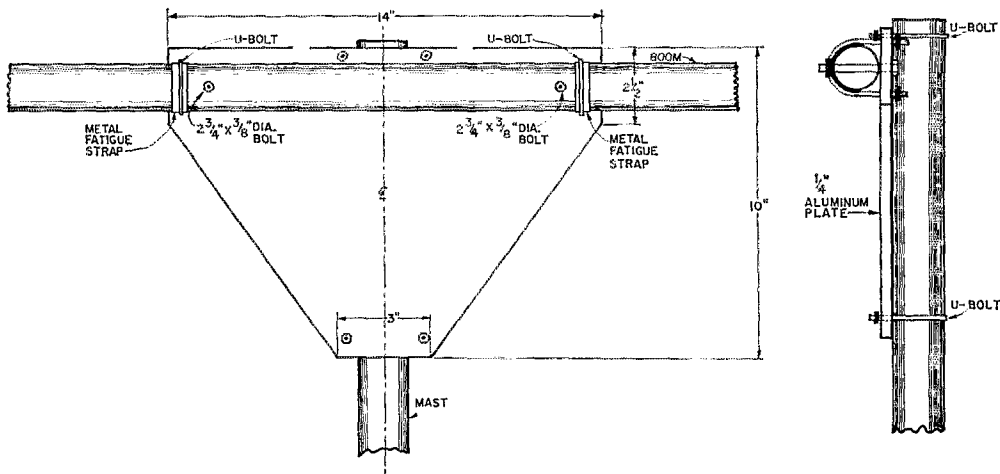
Construction details for the boom-to-mast mounting bracket. The U bolts holding the boom are 2-inch type. Those holding the mast will depend on the mast diameter—we used 1/2-inch U bolts for a 1/2-inch diameter mast.
